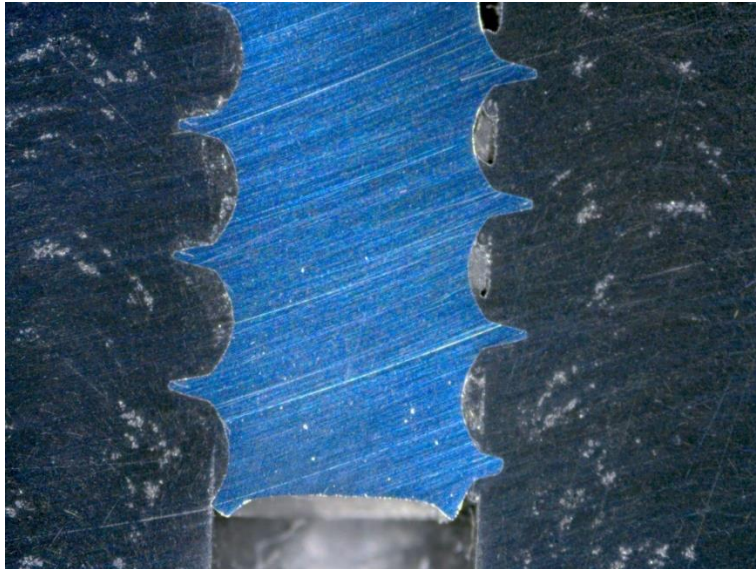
Screw end: b&m-CARBONPLAST® 5x20 in PEEK-XCF30 with core hole \varnothing 4.0 mm (1° conical – thread-tapping area)
